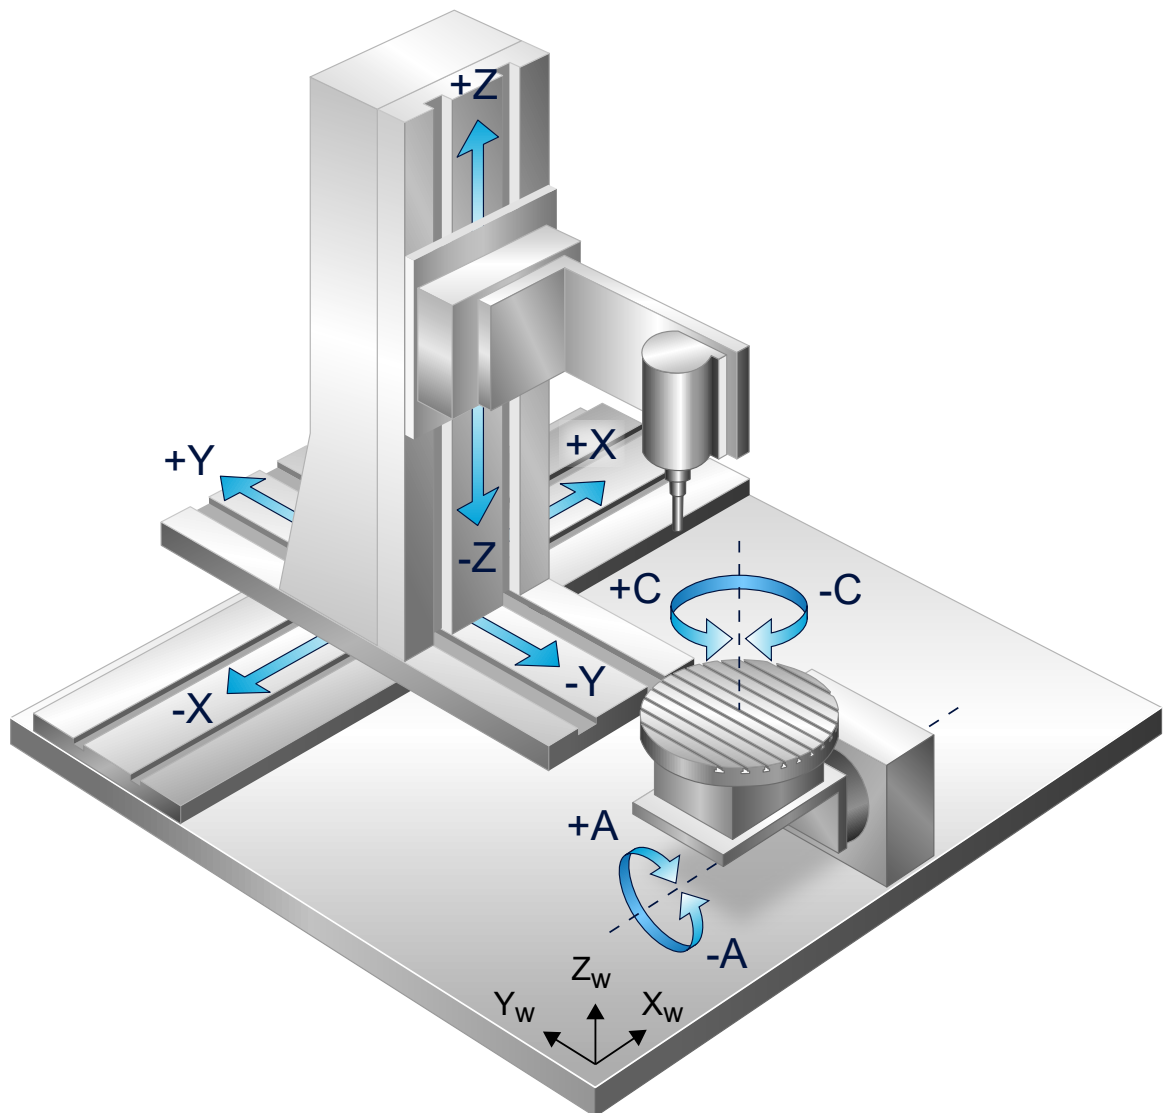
Kinematics of 5-axis machine with AC workpiece table
